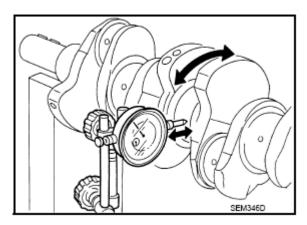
Checking Crankshaft Runout Using Dial Indicator Courtesy of NISSAN NORTH AMERICA, INC.
